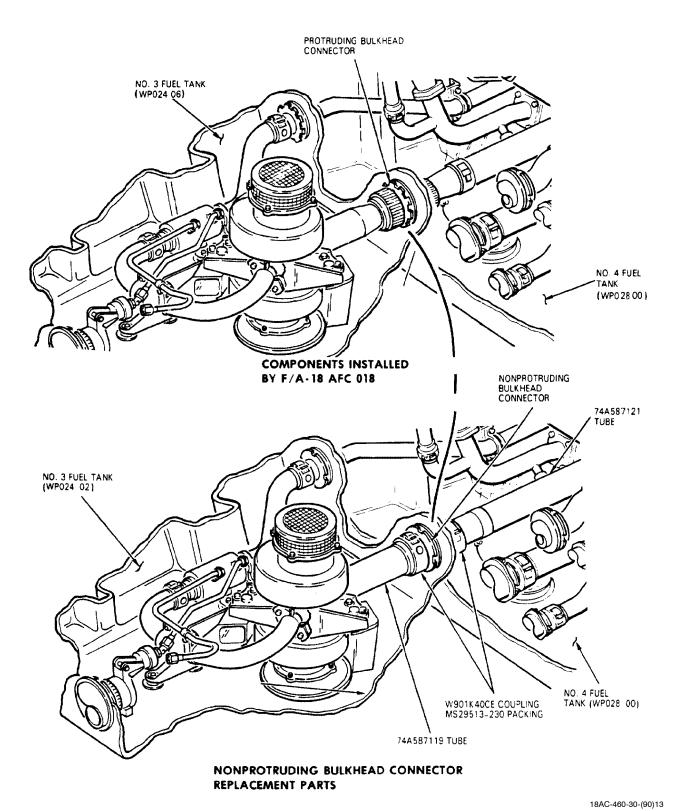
No. 3 Fuel Tank To No. 4 Fuel Tank RH Engine Feed Line Bulkhead Connector Replacement Parts 161353 THRU 161715 AFTER F/A-18 AFC 018
